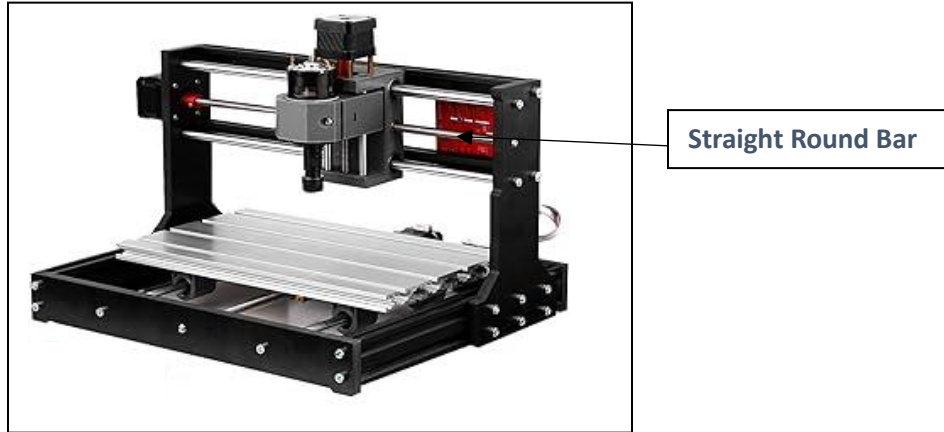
5500 mw Upgrade Version CNC 3018 Pro GRBL Control DIY Mini CNC Machine 3 Axis PCB Milling Machine Wood Router Engraver with Offline Controller with ER11 and 5mm Extension Rod Working Area 300\*180x40mm [87]
